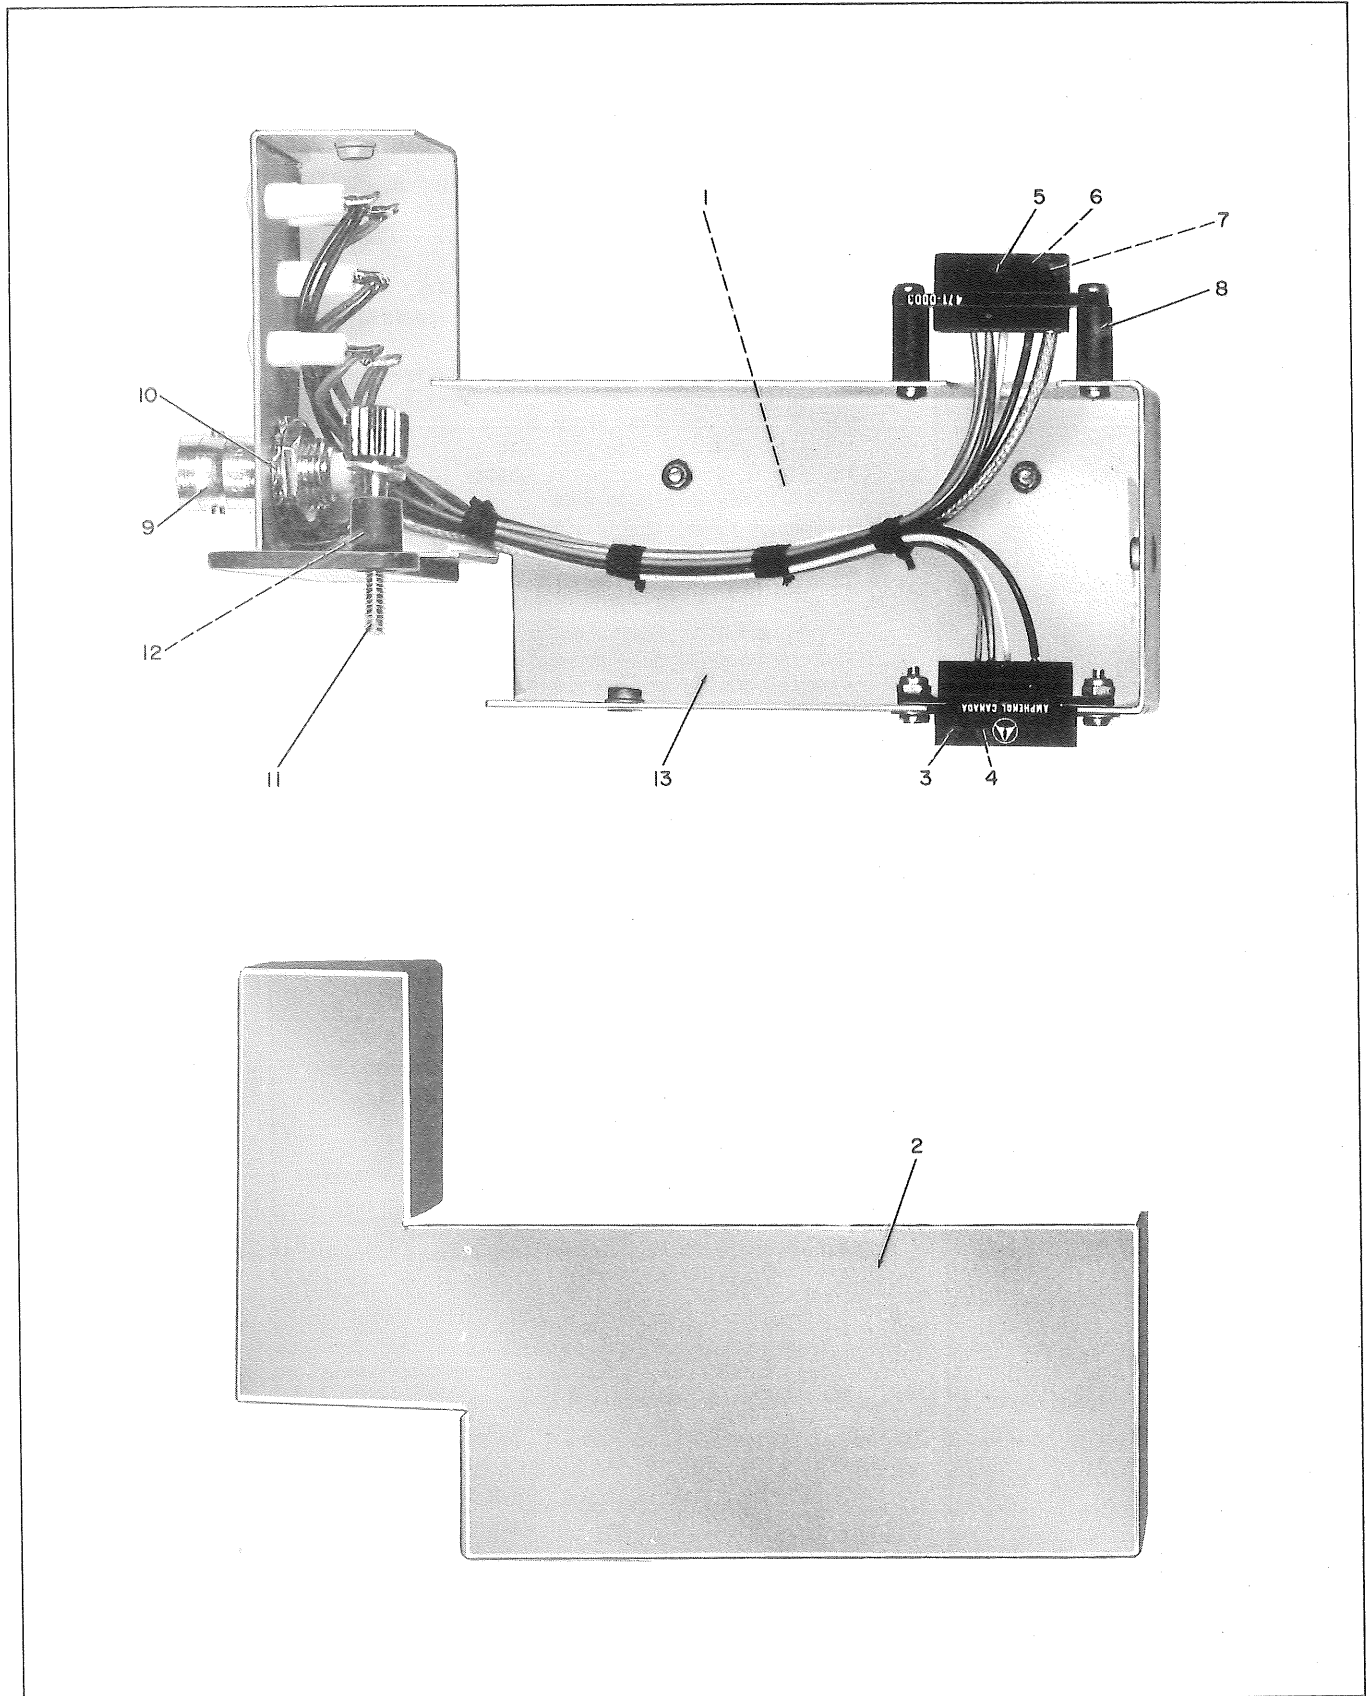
Adapter, Test MX-8593/PRC-66B
